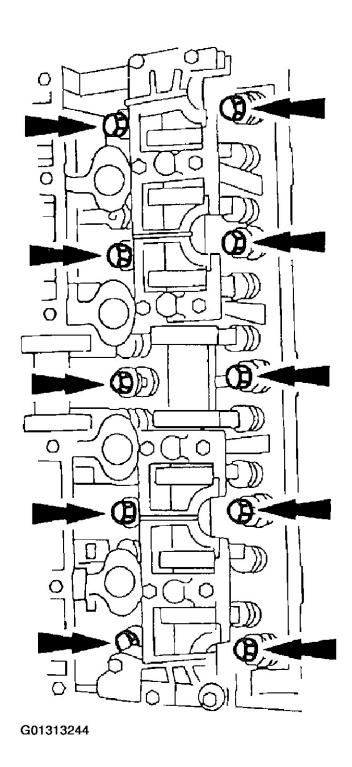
Installing Cylinder Head Bolts Courtesy of FORD MOTOR CO.
